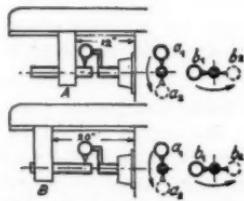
, b.—a/b Trammel reading overarm of milling machine.
